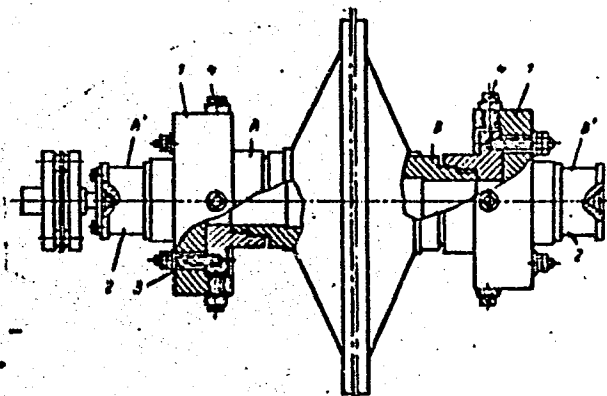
Balancing and machining fixture: 1 - chuck; 2 - support; 3 - pin; 4 - set screw.
